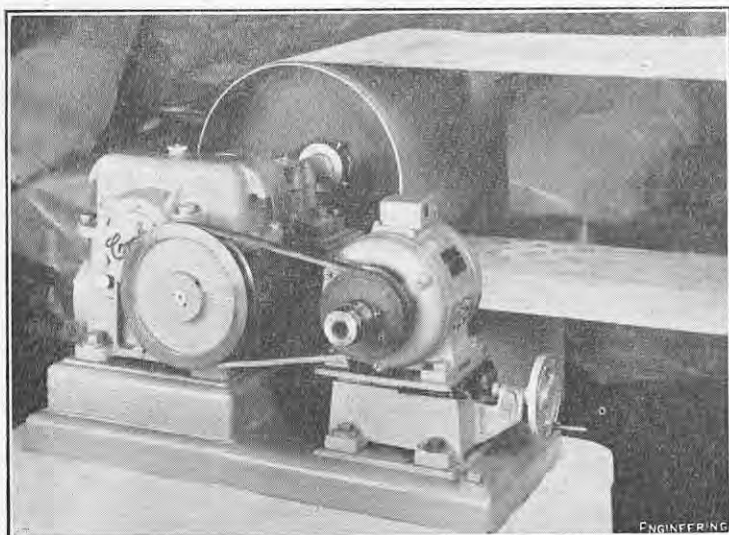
CONVEYOR DRIVING HEAD; CROFTS (ENGINEERS), LIMITED.
